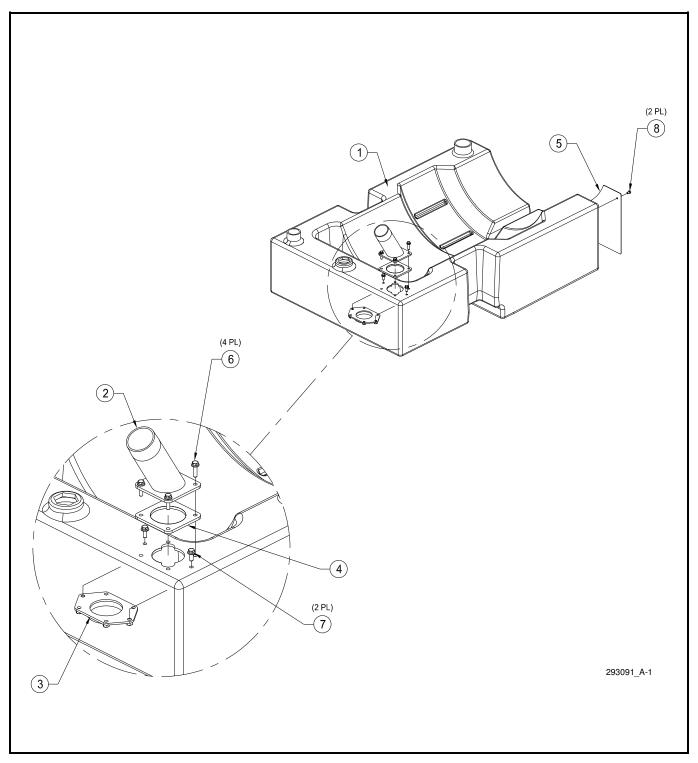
Fuel Tank Composite Assembly, CP (Sheet 1 of 2).
